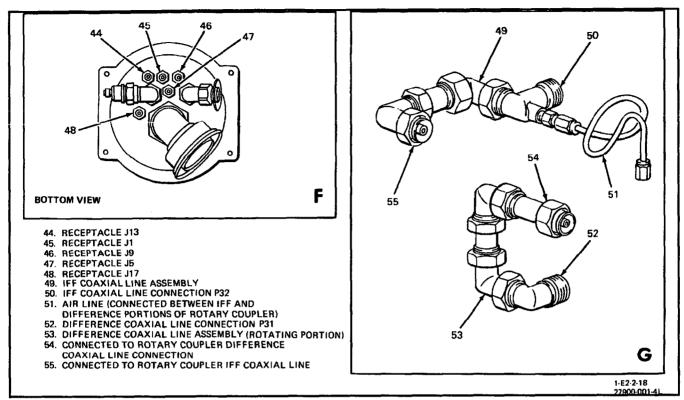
Removal and Installation of Radio Frequency Rotary Coupler CU-2287/A (Sheet 4)
